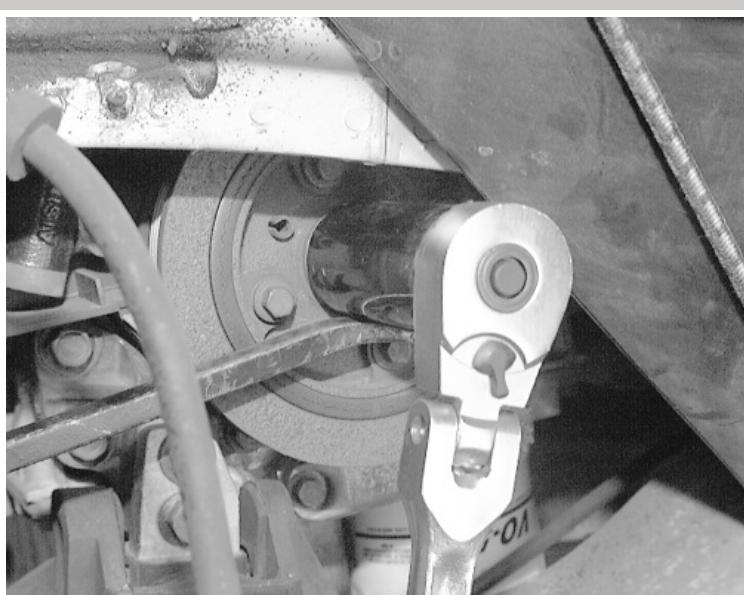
Keep the damper from turning while you remove the center nut
